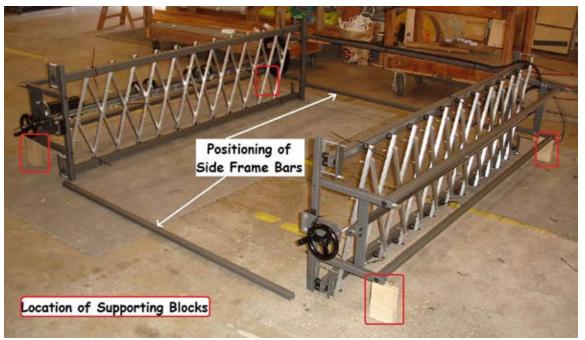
Arrangement of Module Frame Pieces for Assembly
